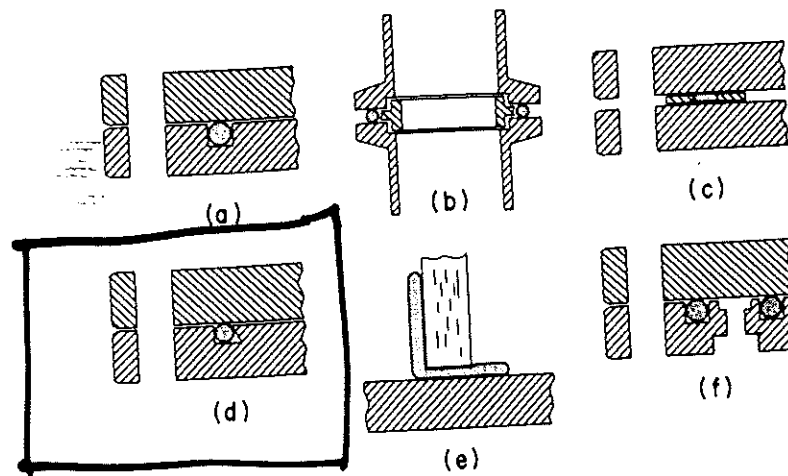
Elastomer seal geometries: (a) rectangular groove, (b) ISO-KF flange with centering ring, (c) confined gasket, (d) dovetail groove, (e) L-gasket, (f) double gasket with differential pumping port.
